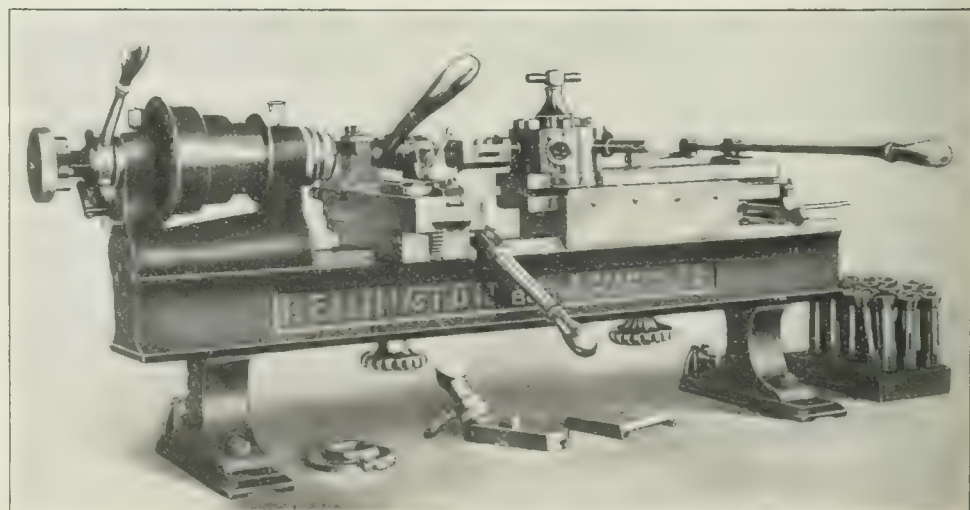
The Tool with Independent Stops on the Turret Slide.
